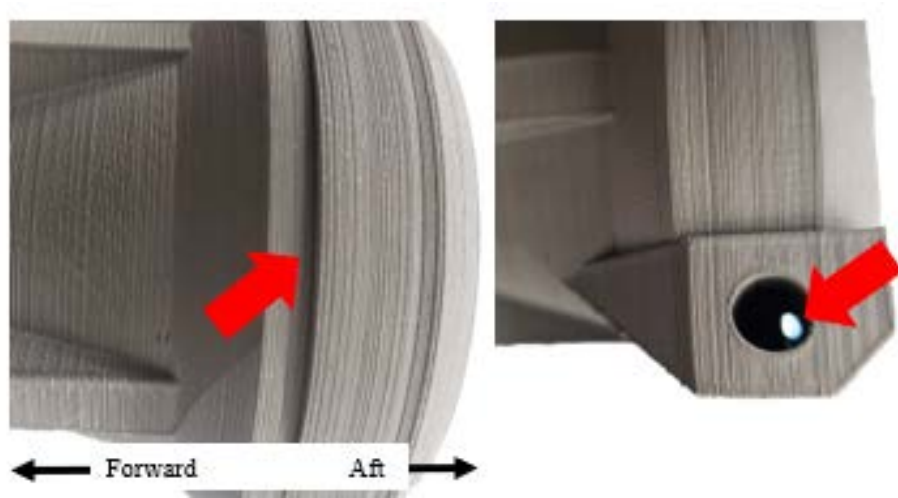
Additive Manufacturing Axial Layer Separation Failure Mode
